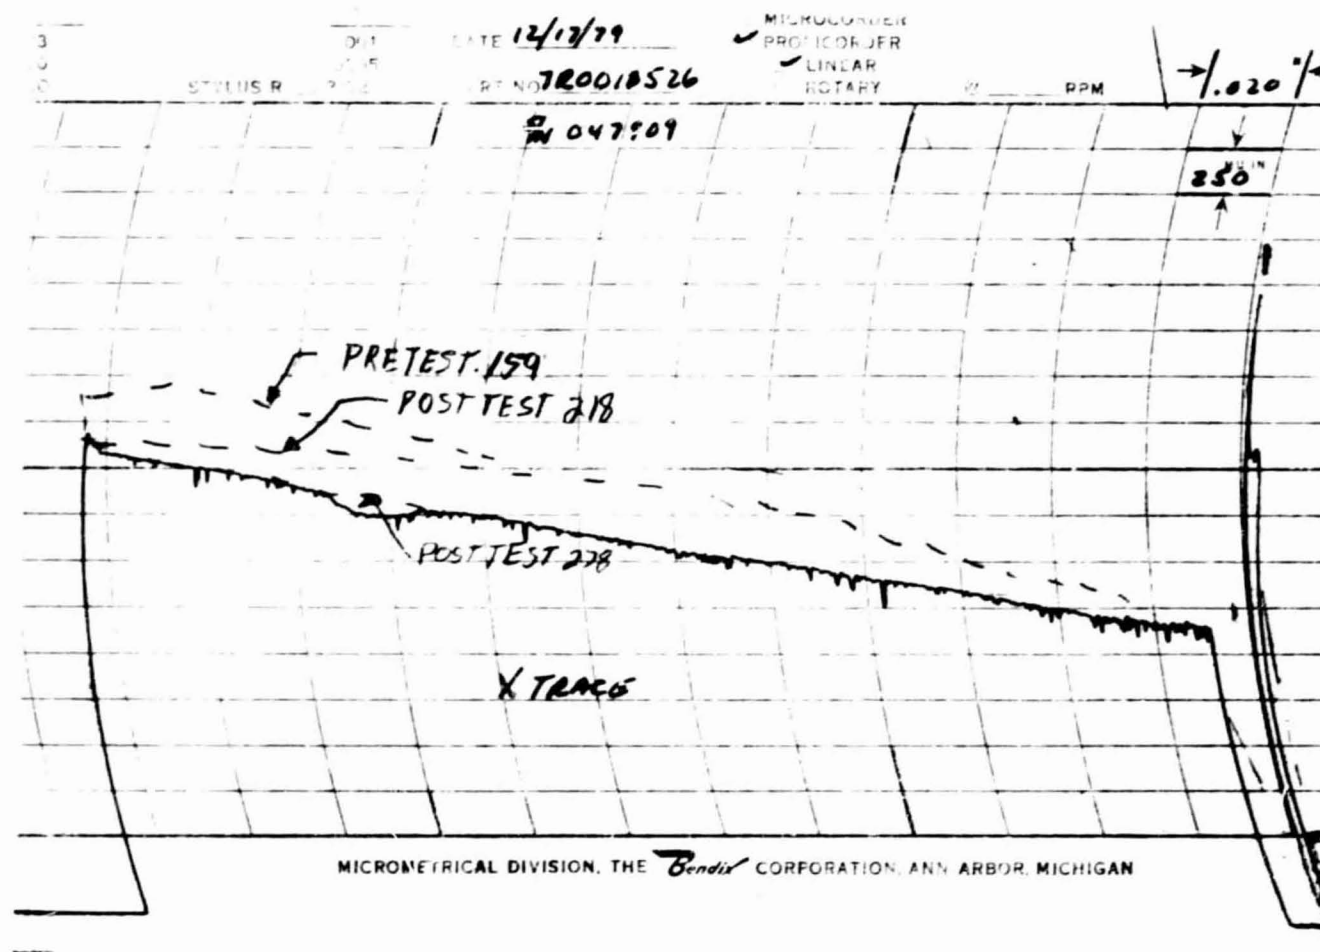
Surface Profile Trace Pump End Secondary Seal Ring, P/N 7R0011526, S/N 047909, Build 15, Posttest 297
